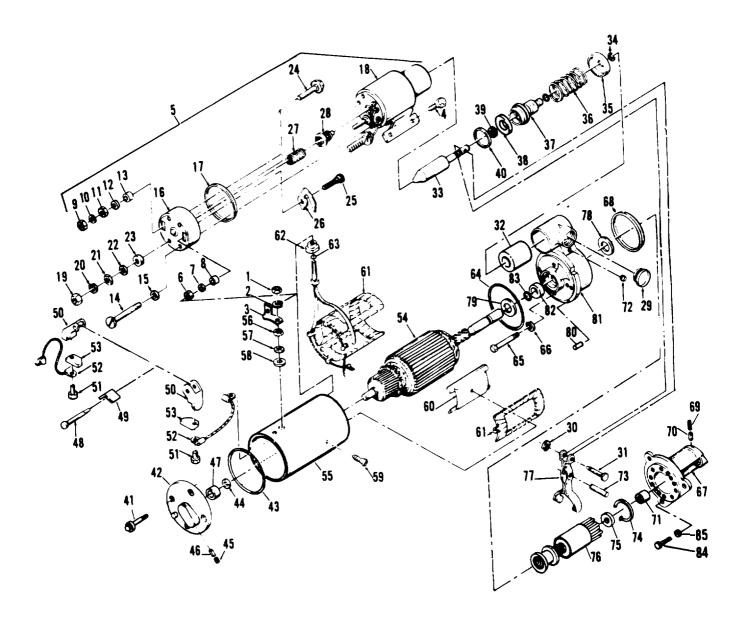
Starter Assembly, Exploded View (Sheet 1 of 2)
